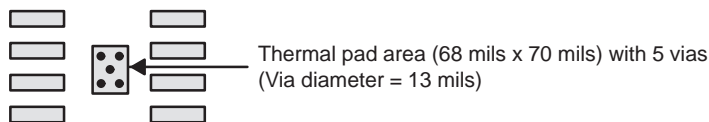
PowerPAD™ PCB Etch and Via Pattern
